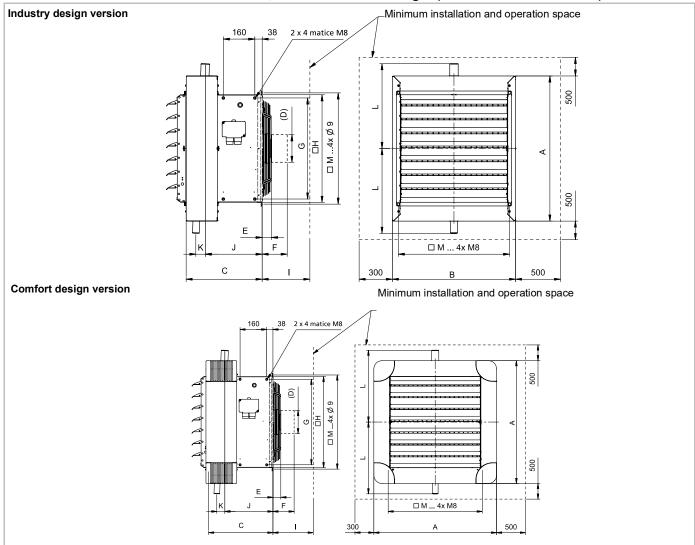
Heating unit dimensions and heat exchanger connection
